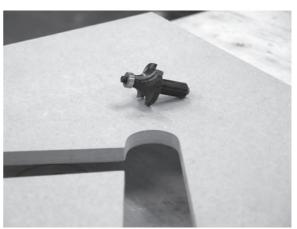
A bearing-guided round over cutter with a radius of 12.7 mm.
